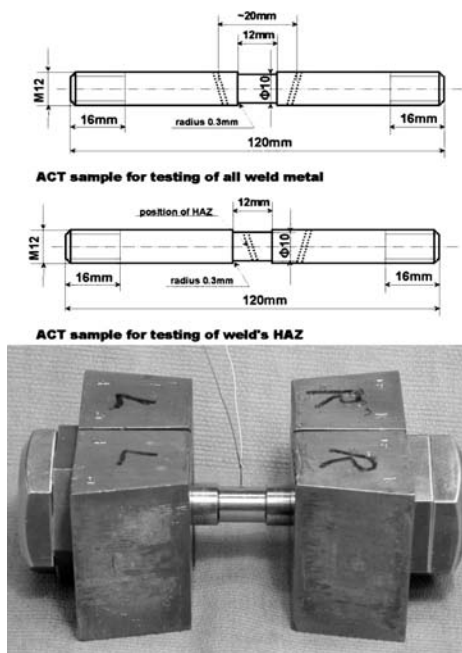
Schematic drawing of cross-weld samples used for ACT on all-weld-metal and on weld's HAZ, and mounting of the sample in Gleeble's jaws set
